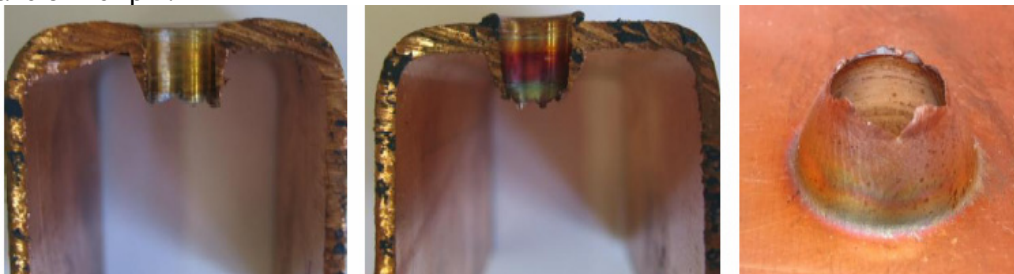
a) Bushing without collar. b) Bushing with collar. c) Cu bushing
